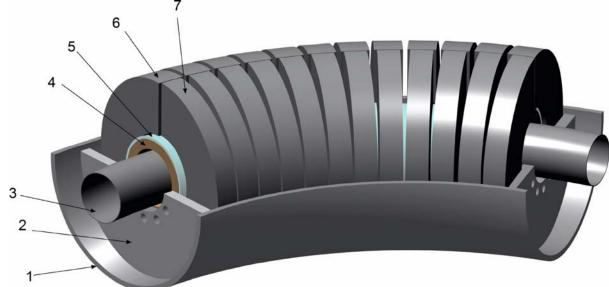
Bent magnet assembly components. 1 – Lower helium containment half shell. 2 – Coil end loading plate. 3 – cold bore tube. 4- Double-helix coil assembly. 5 – Coil insulating spacer with provisions for axial helium cooling flow. 6 – Laminated low carbon steel yoke block (50 mm). 7 – Thinner (40 mm) laminated yoke block. Note: The upper helium half shell and helium containment end closures are not shown.
